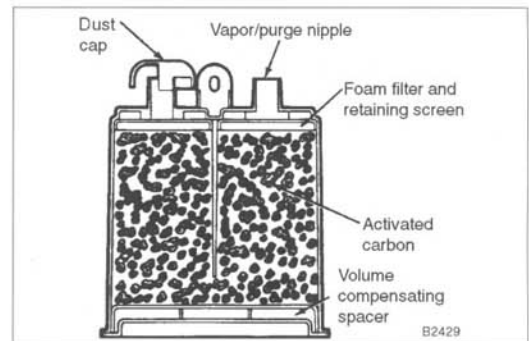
Carbon canister stores fuel vapors from tank and engine. Canister is purged by drawing fuel vapor into engine, under control of the control module.
